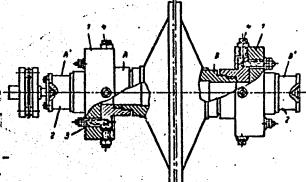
Balancing and machining fixture: 1 - chuck; 2 support; 3 - pin; 4 - set screw.
